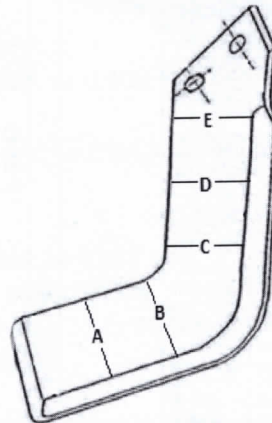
DIMENSIONS FOR WEAR ANALYSIS
